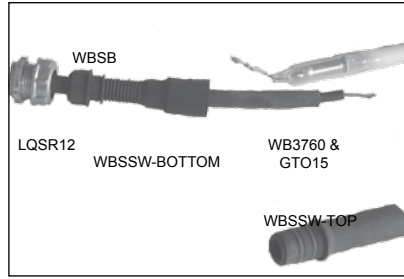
Slide bottom part of Wetbits Short Sleeve over WB3760 and GTO Cable
